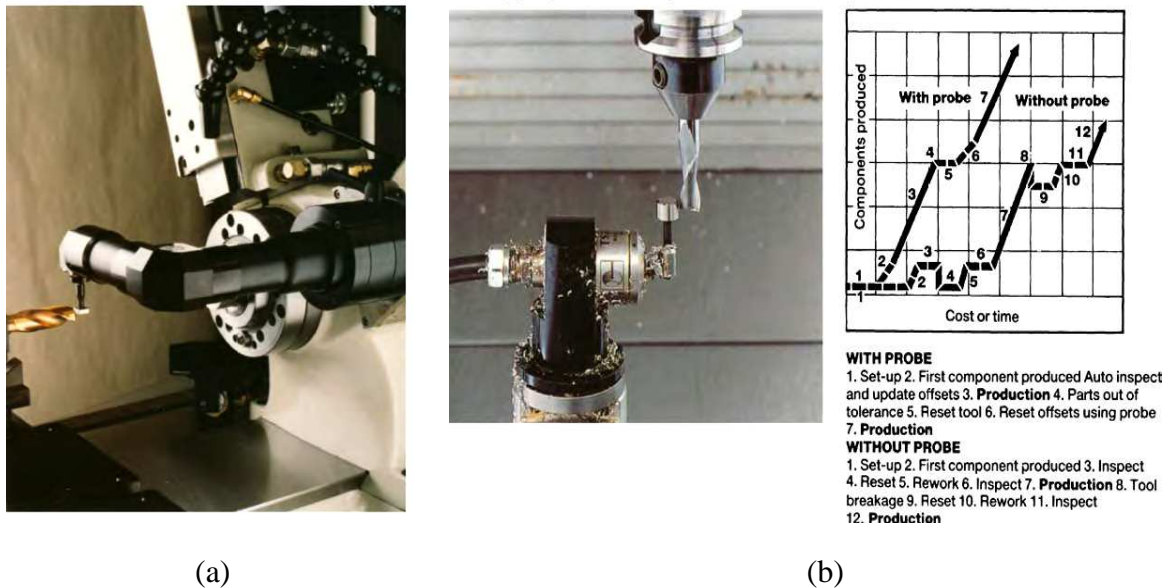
Cutting tool offsets being set on a turning and machining center:
